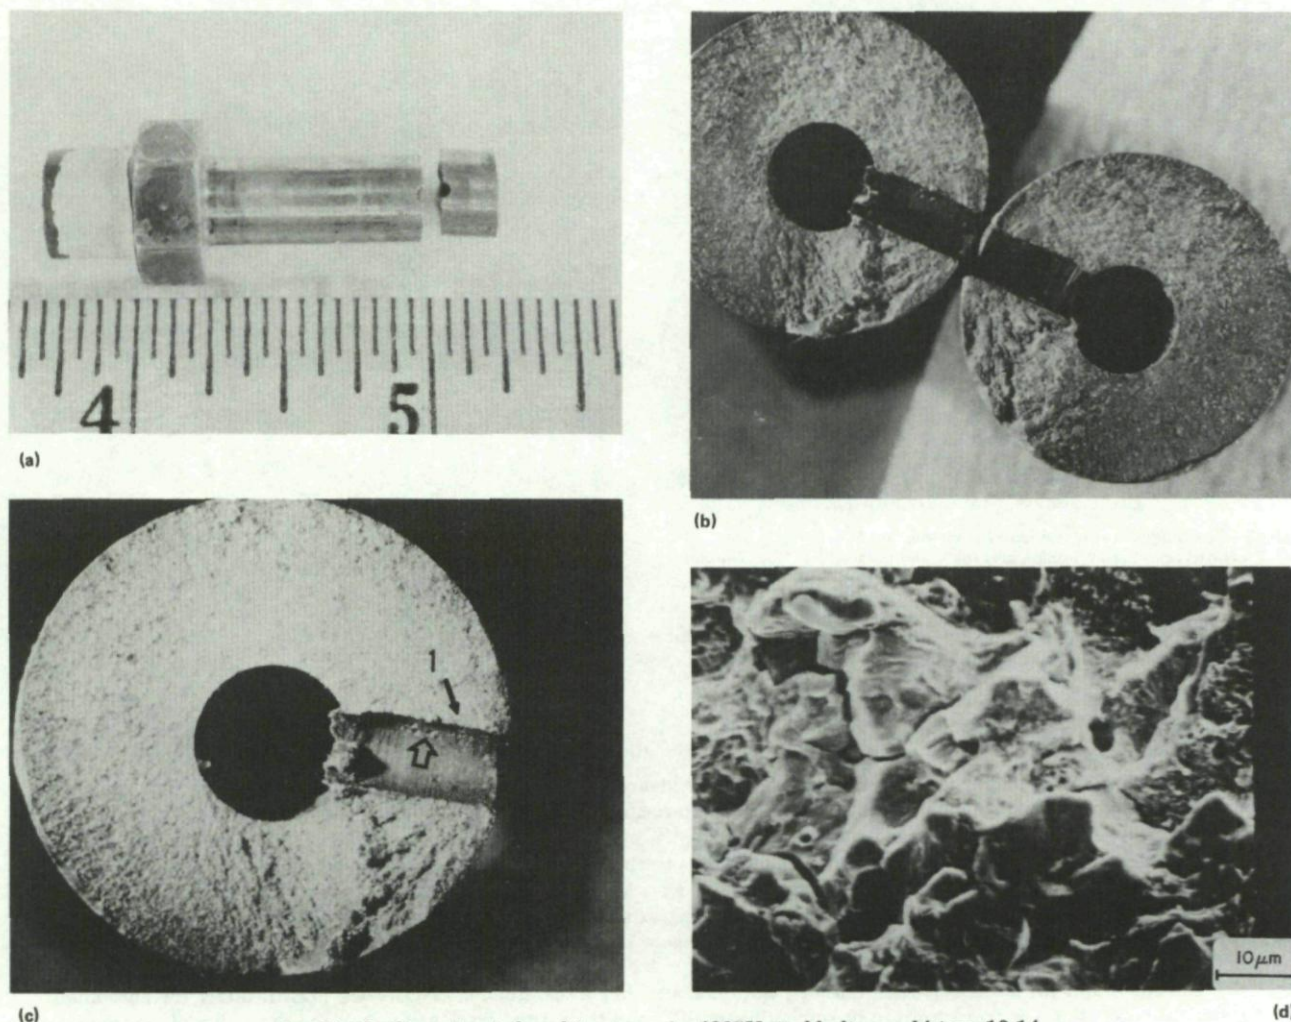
Corrosion induced fracture of a 4335V steel bolt, case history 13-14.
